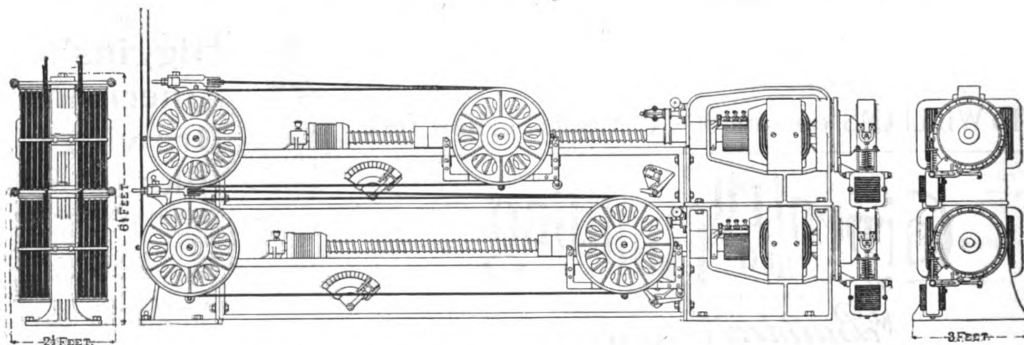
Side and End Elevations of Double Multiple Sheave Electric Passenger Elevator.
